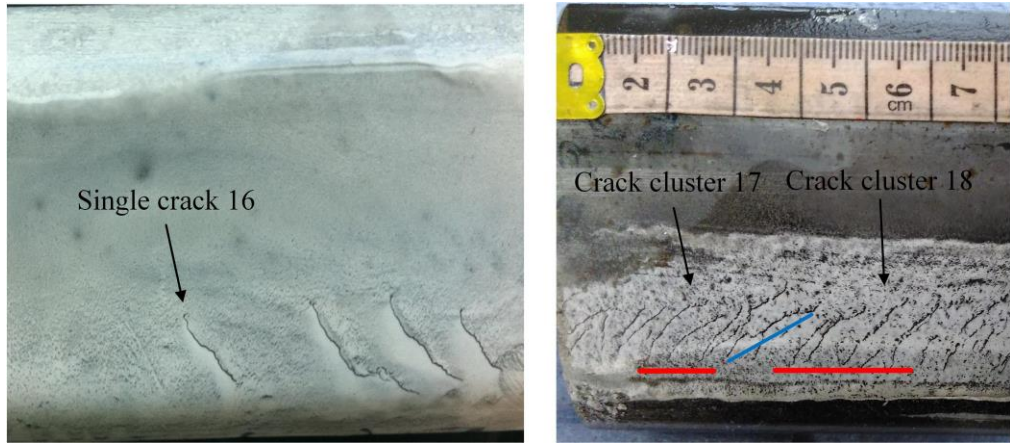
Images of sample taken on rails removed from service showing single and multiple cracks inspected by manual and robotic ACFM, respectively.
